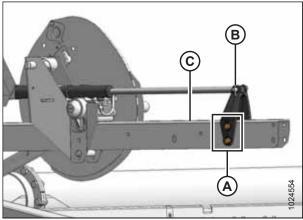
Right Reel Arm Cylinder in Aft Position
